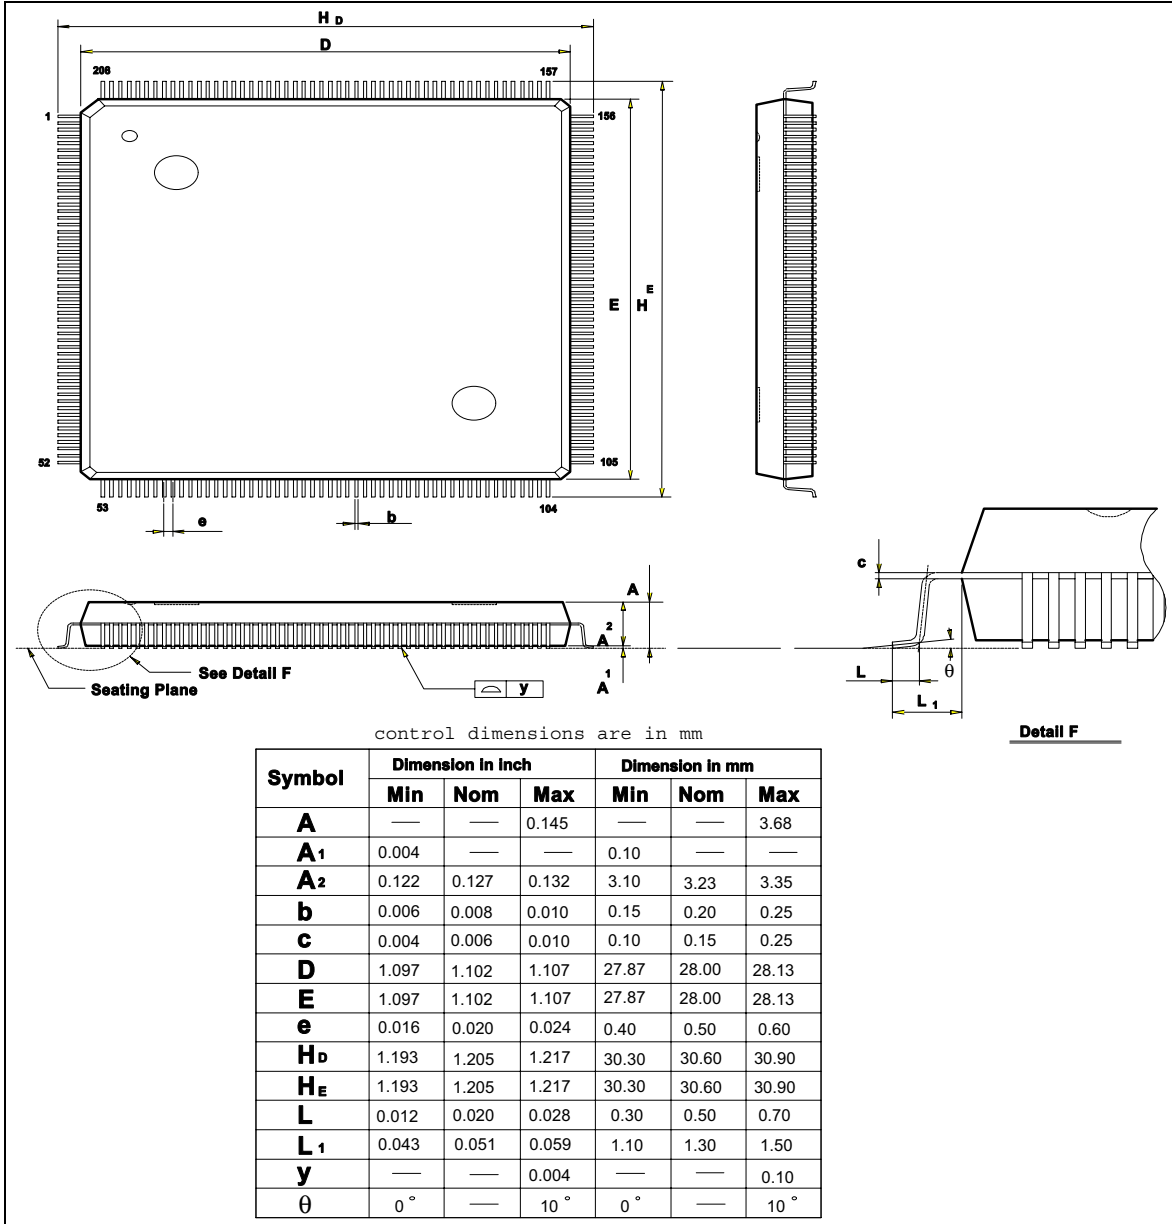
208L QFP (28X28 mm footprint 2.6mm) Dimensions
